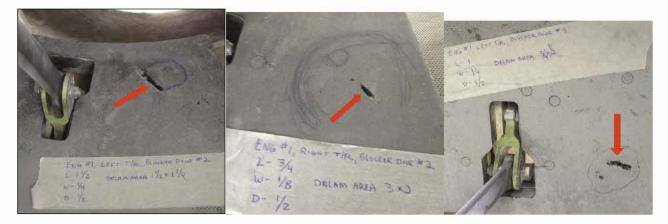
A, B, C - Damage to Left Engine Blocker Doors
